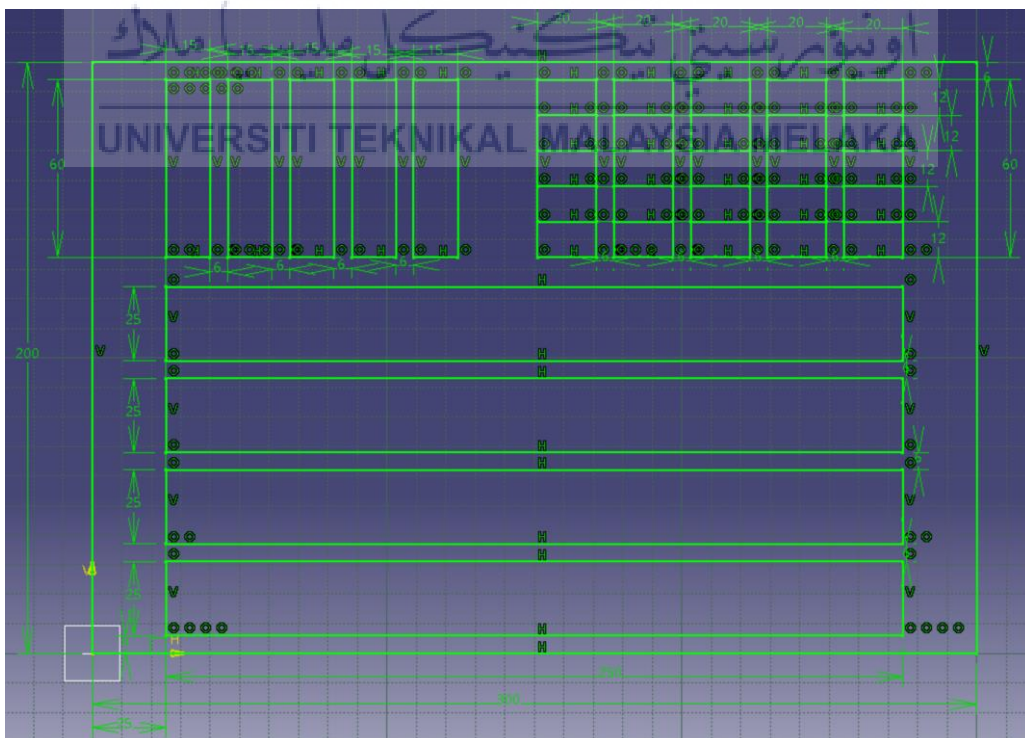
The dimensional design of specimens for flexural, impact and water absorption testing
